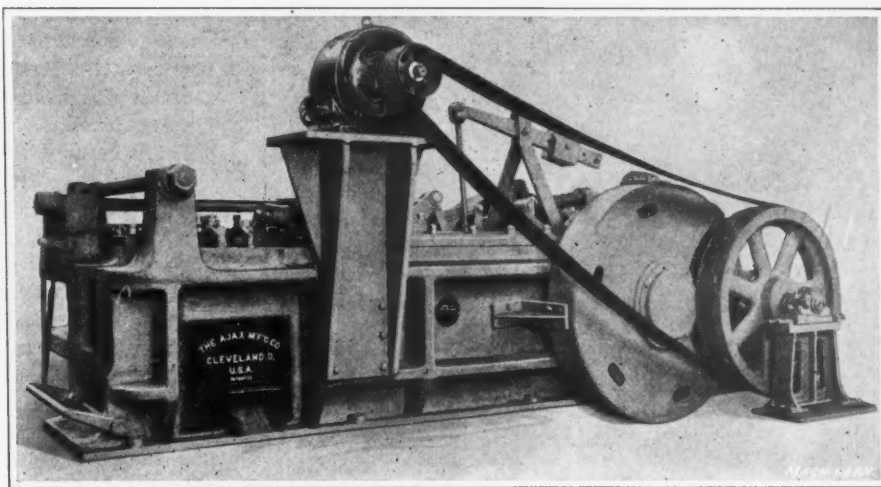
Improved Type of Upsetting Forging Machine built by the Ajax Mfg. Co.
